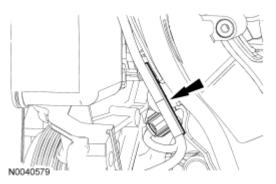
Locating Electrical Connector Pin-Type Retainer Courtesy of FORD MOTOR CO.
